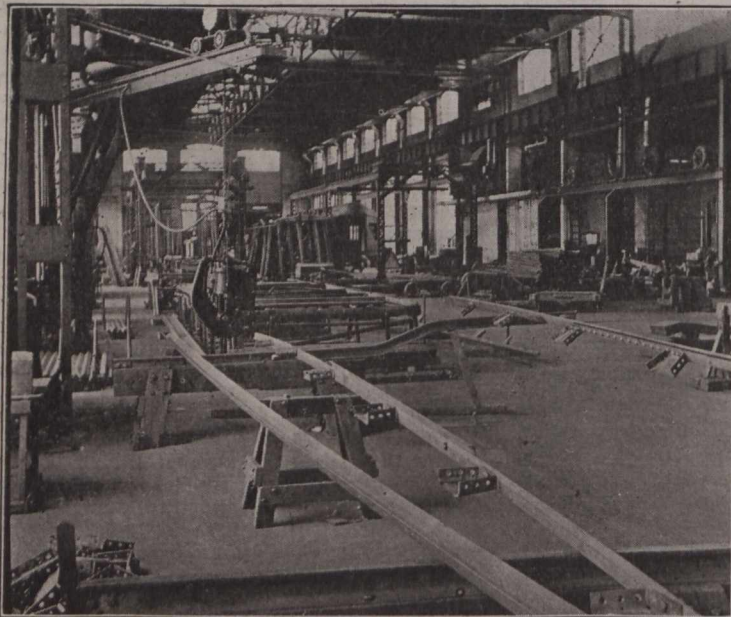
Assembling Parts for Steel Freight Car Side Rails.
